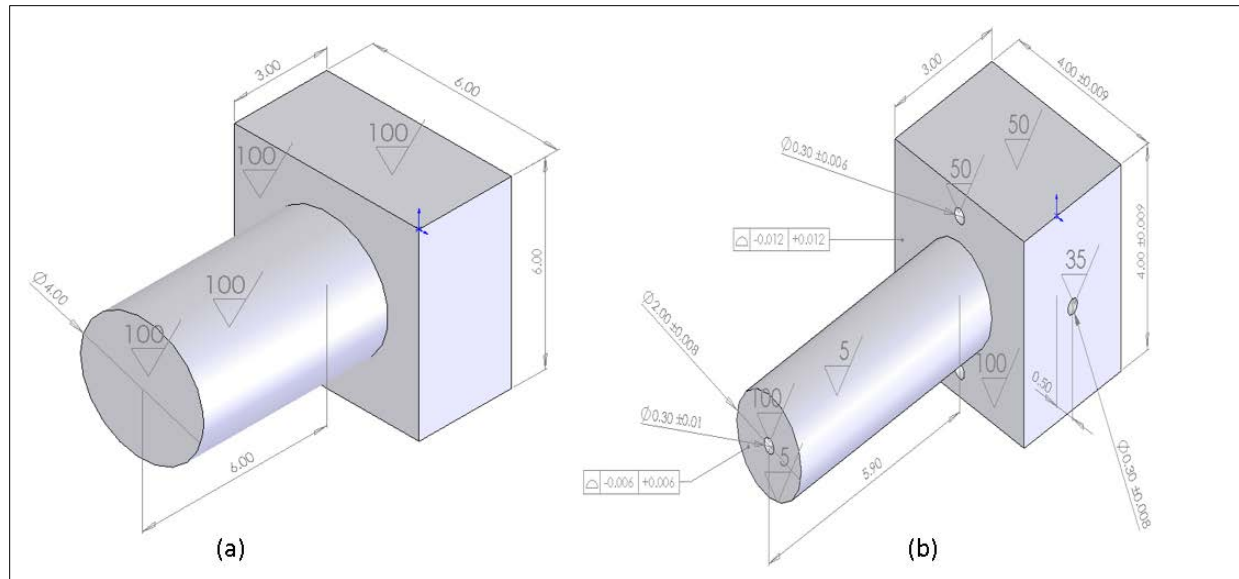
(a) Initial dimensions of the stock (b) Final dimensions of the product
